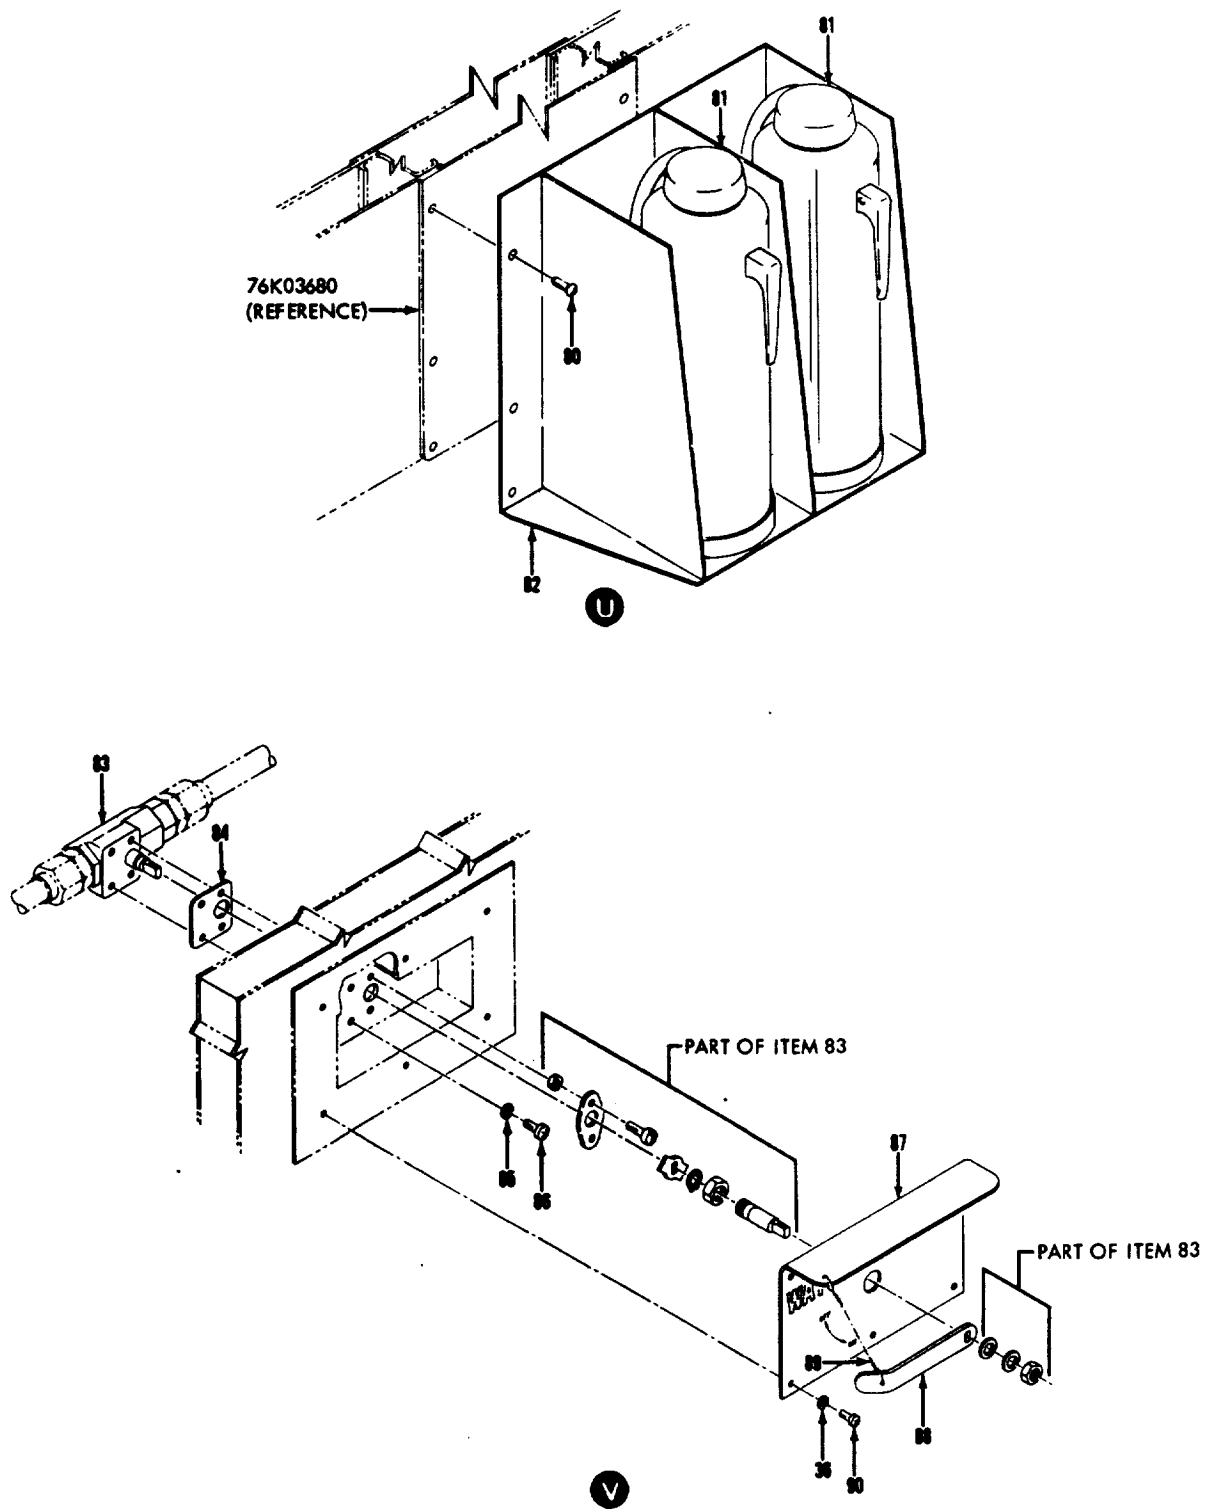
Equipment Installation (Sheet 9 of 25)
